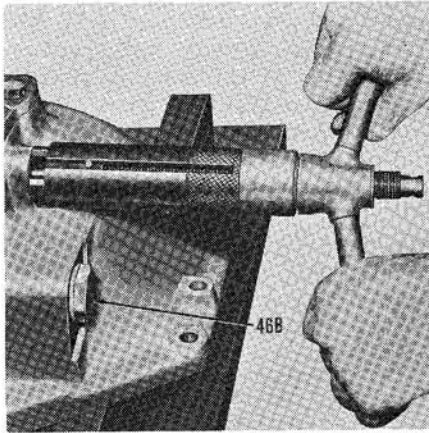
Removing check valve seat; English tool is shown. Refer to text for procedure. Early type relief valve is (46B).
